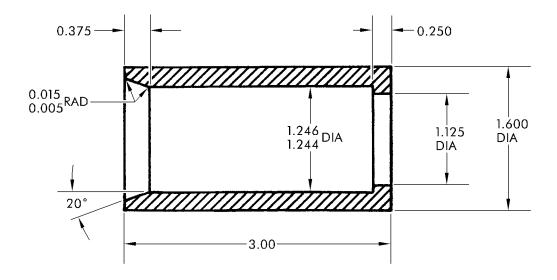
Fuel Injector Boss Lapping Fixture LMT 754
